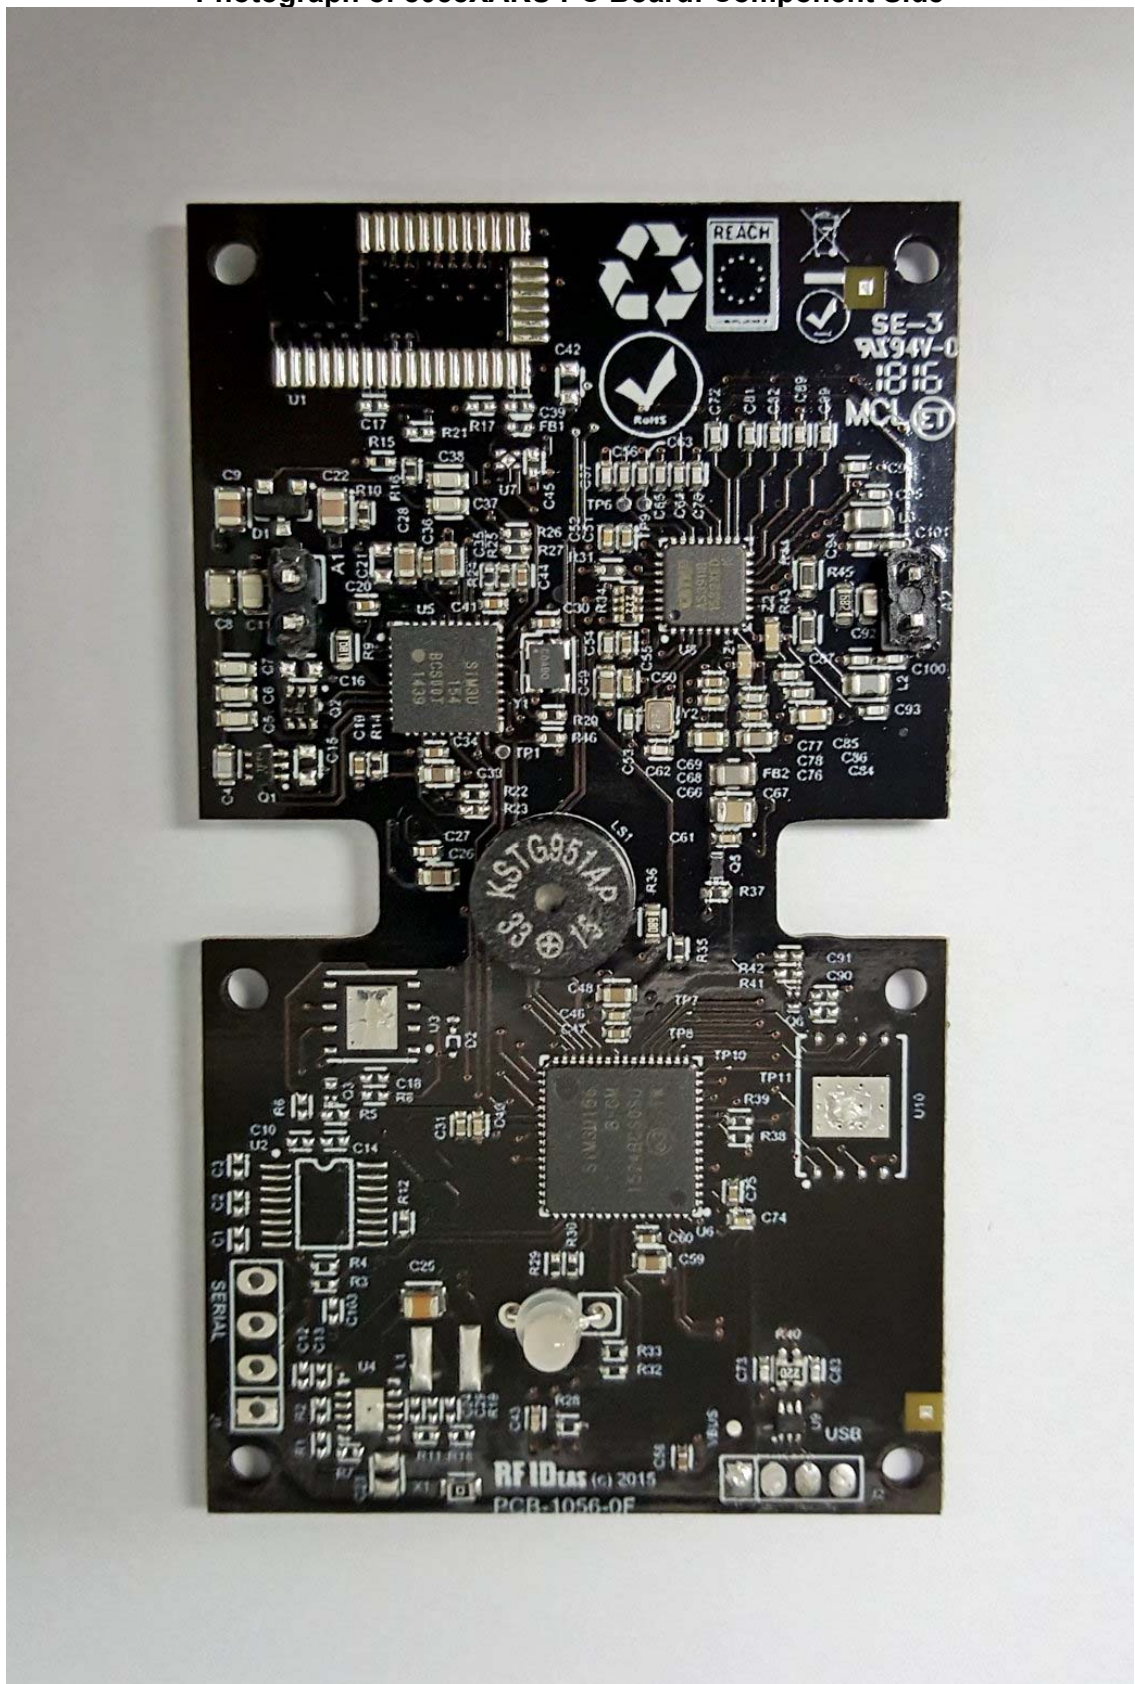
XAKU PC Board: Component Side; fully assembled
